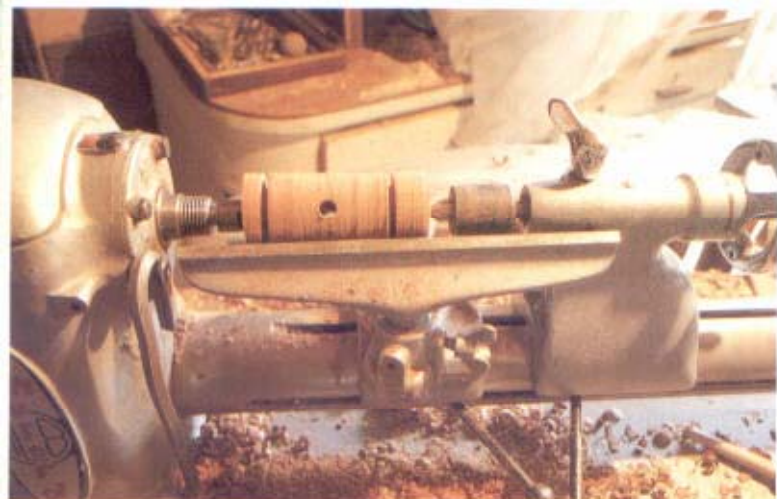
The hole was drilled through the crosspiece before turning began. The piece was rough turned to  $1\frac{1}{4}$  in (44mm) diameter and the length defined with a parting tool.
